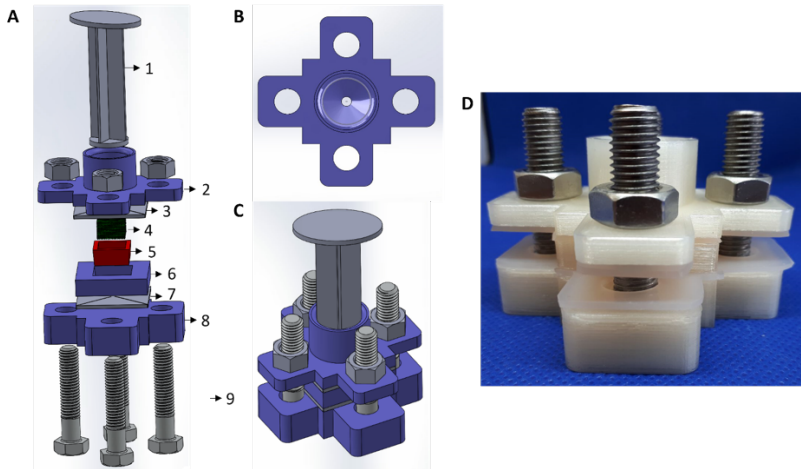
Injection moulding set-up applied for AUP injection-based indirect 3D printing. A) Overview of all the components of the designed non-assembled set-up, B) top view of the upper runner system, C) view of the designed assembled set-up, and D) image of the fabricated assembled set-up.
